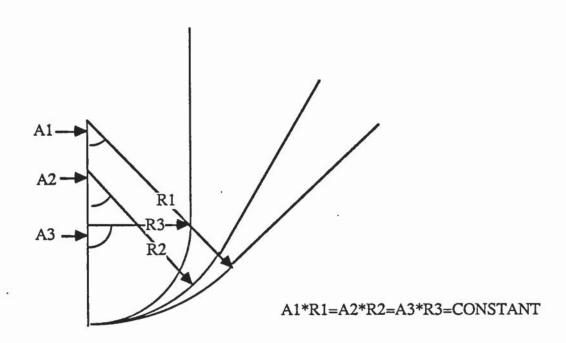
CONSTANT ELEMENT LENGTH METHOD OF FORMING BENDS
